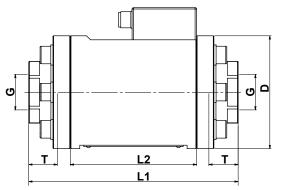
Dimensioned drawing pipe thread (schematic diagram)
